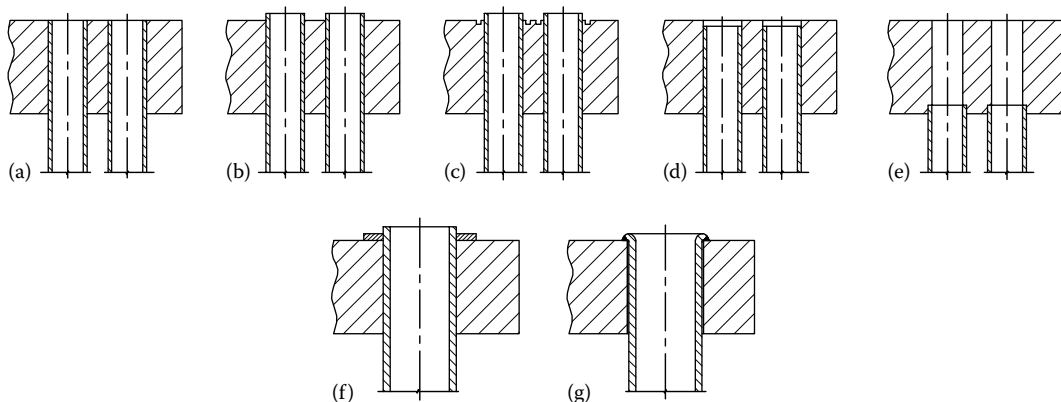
Commonly adopted tube-to-tubesheet joint configuration for welding. Note: (a) Tube flush with the tubesheet, (b) projecting tube, (c) trepanned tubesheet, (d) recessed tube, (e) rear side welding, (f) added ring weld type, and (g) bell-mouthed and fused welding. (Courtesy of Polysoude, S.A.S, Nantes, France.)
